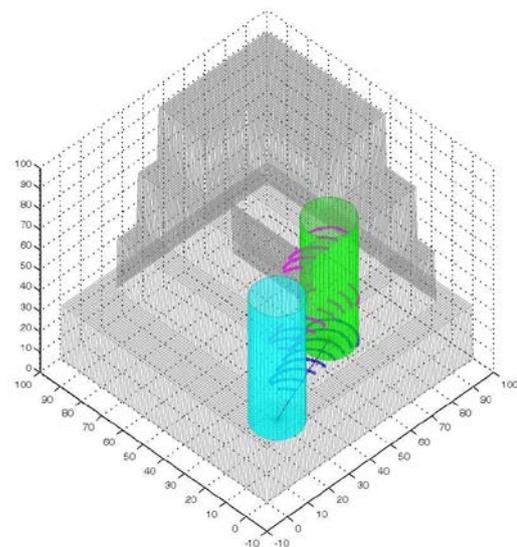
Bottom and top contact lines and tool positions at the start and the end of the first tool path segment
